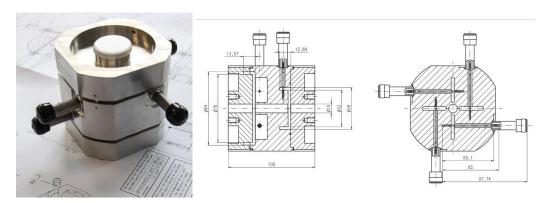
Undulator cavity BPM. On the left hand side a prototype is shown. The drawings on the right hand side show the inner geometry of the BPM.
